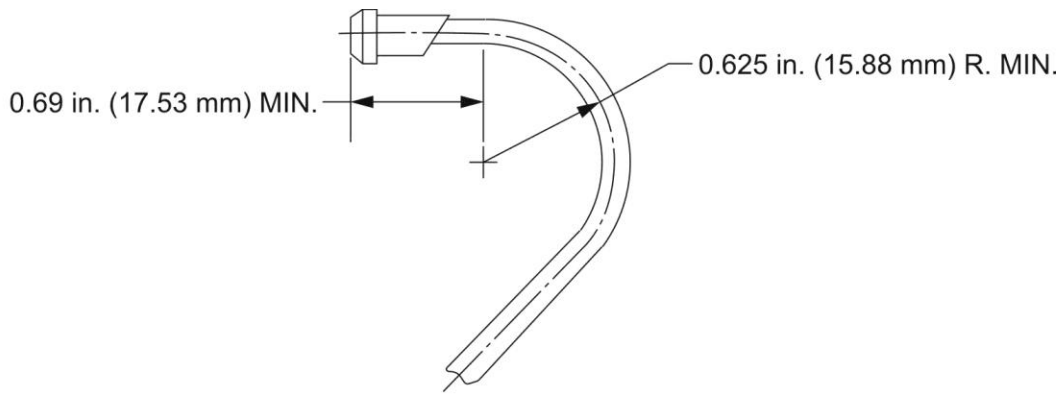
Fuel Line Showing Minimum Dimension for Bending
